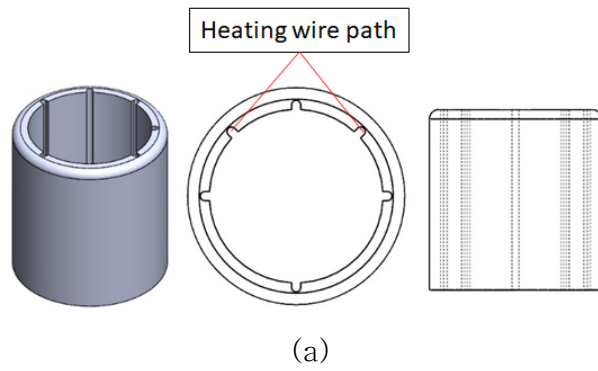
Steerable catheter with SMP joint. (a) Backbone ring for SMP tube (Left:Isometric view, Center:Front view, Right:Side view)
